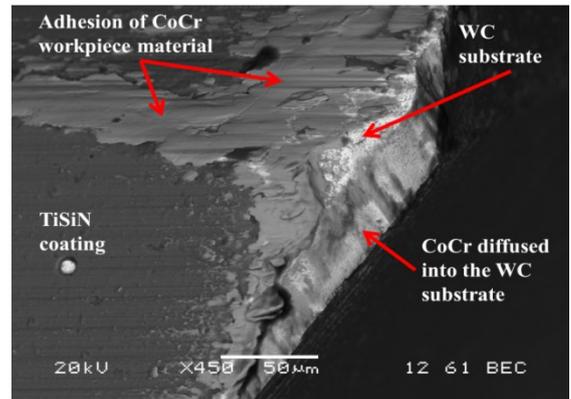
Micrograph of the cutting edge of the tool used for cryogenic machining experiment depicting smearing and diffusion of workpiece material onto the cutting tool
